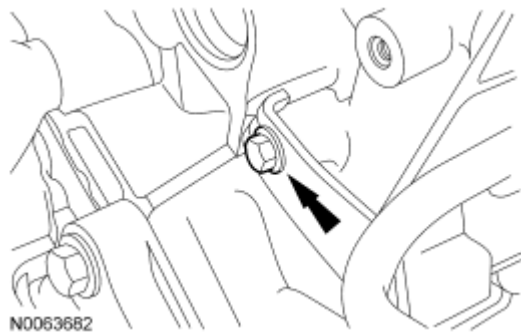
Identifying Power Steering Pressure (PSP) Tube & Bracket Assembly
